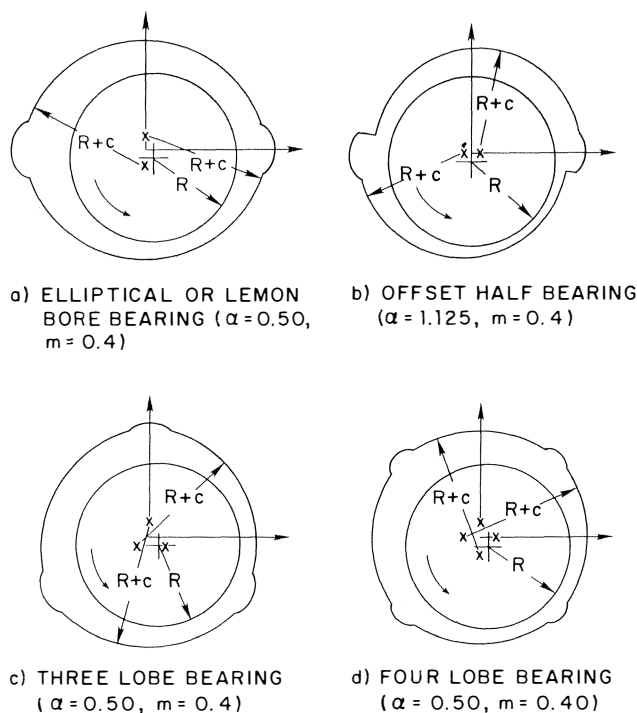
Types of Fixed Pad Preloaded Journal Bearings.
